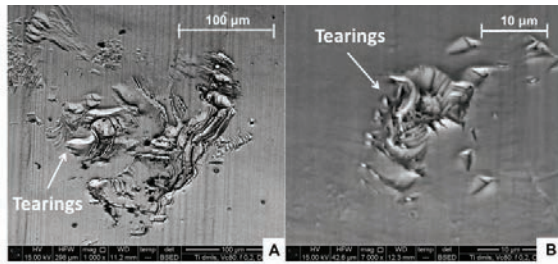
Surface defects found in as-built DMLS samples machined under a) dry and b) cryogenic conditions.
